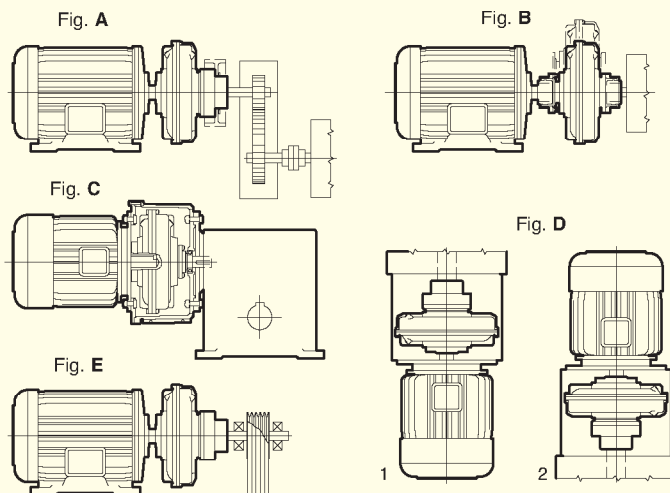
Fig. A Horizontal axis between the motor and the driven machine (KR-CKR-CCKR and similar).
